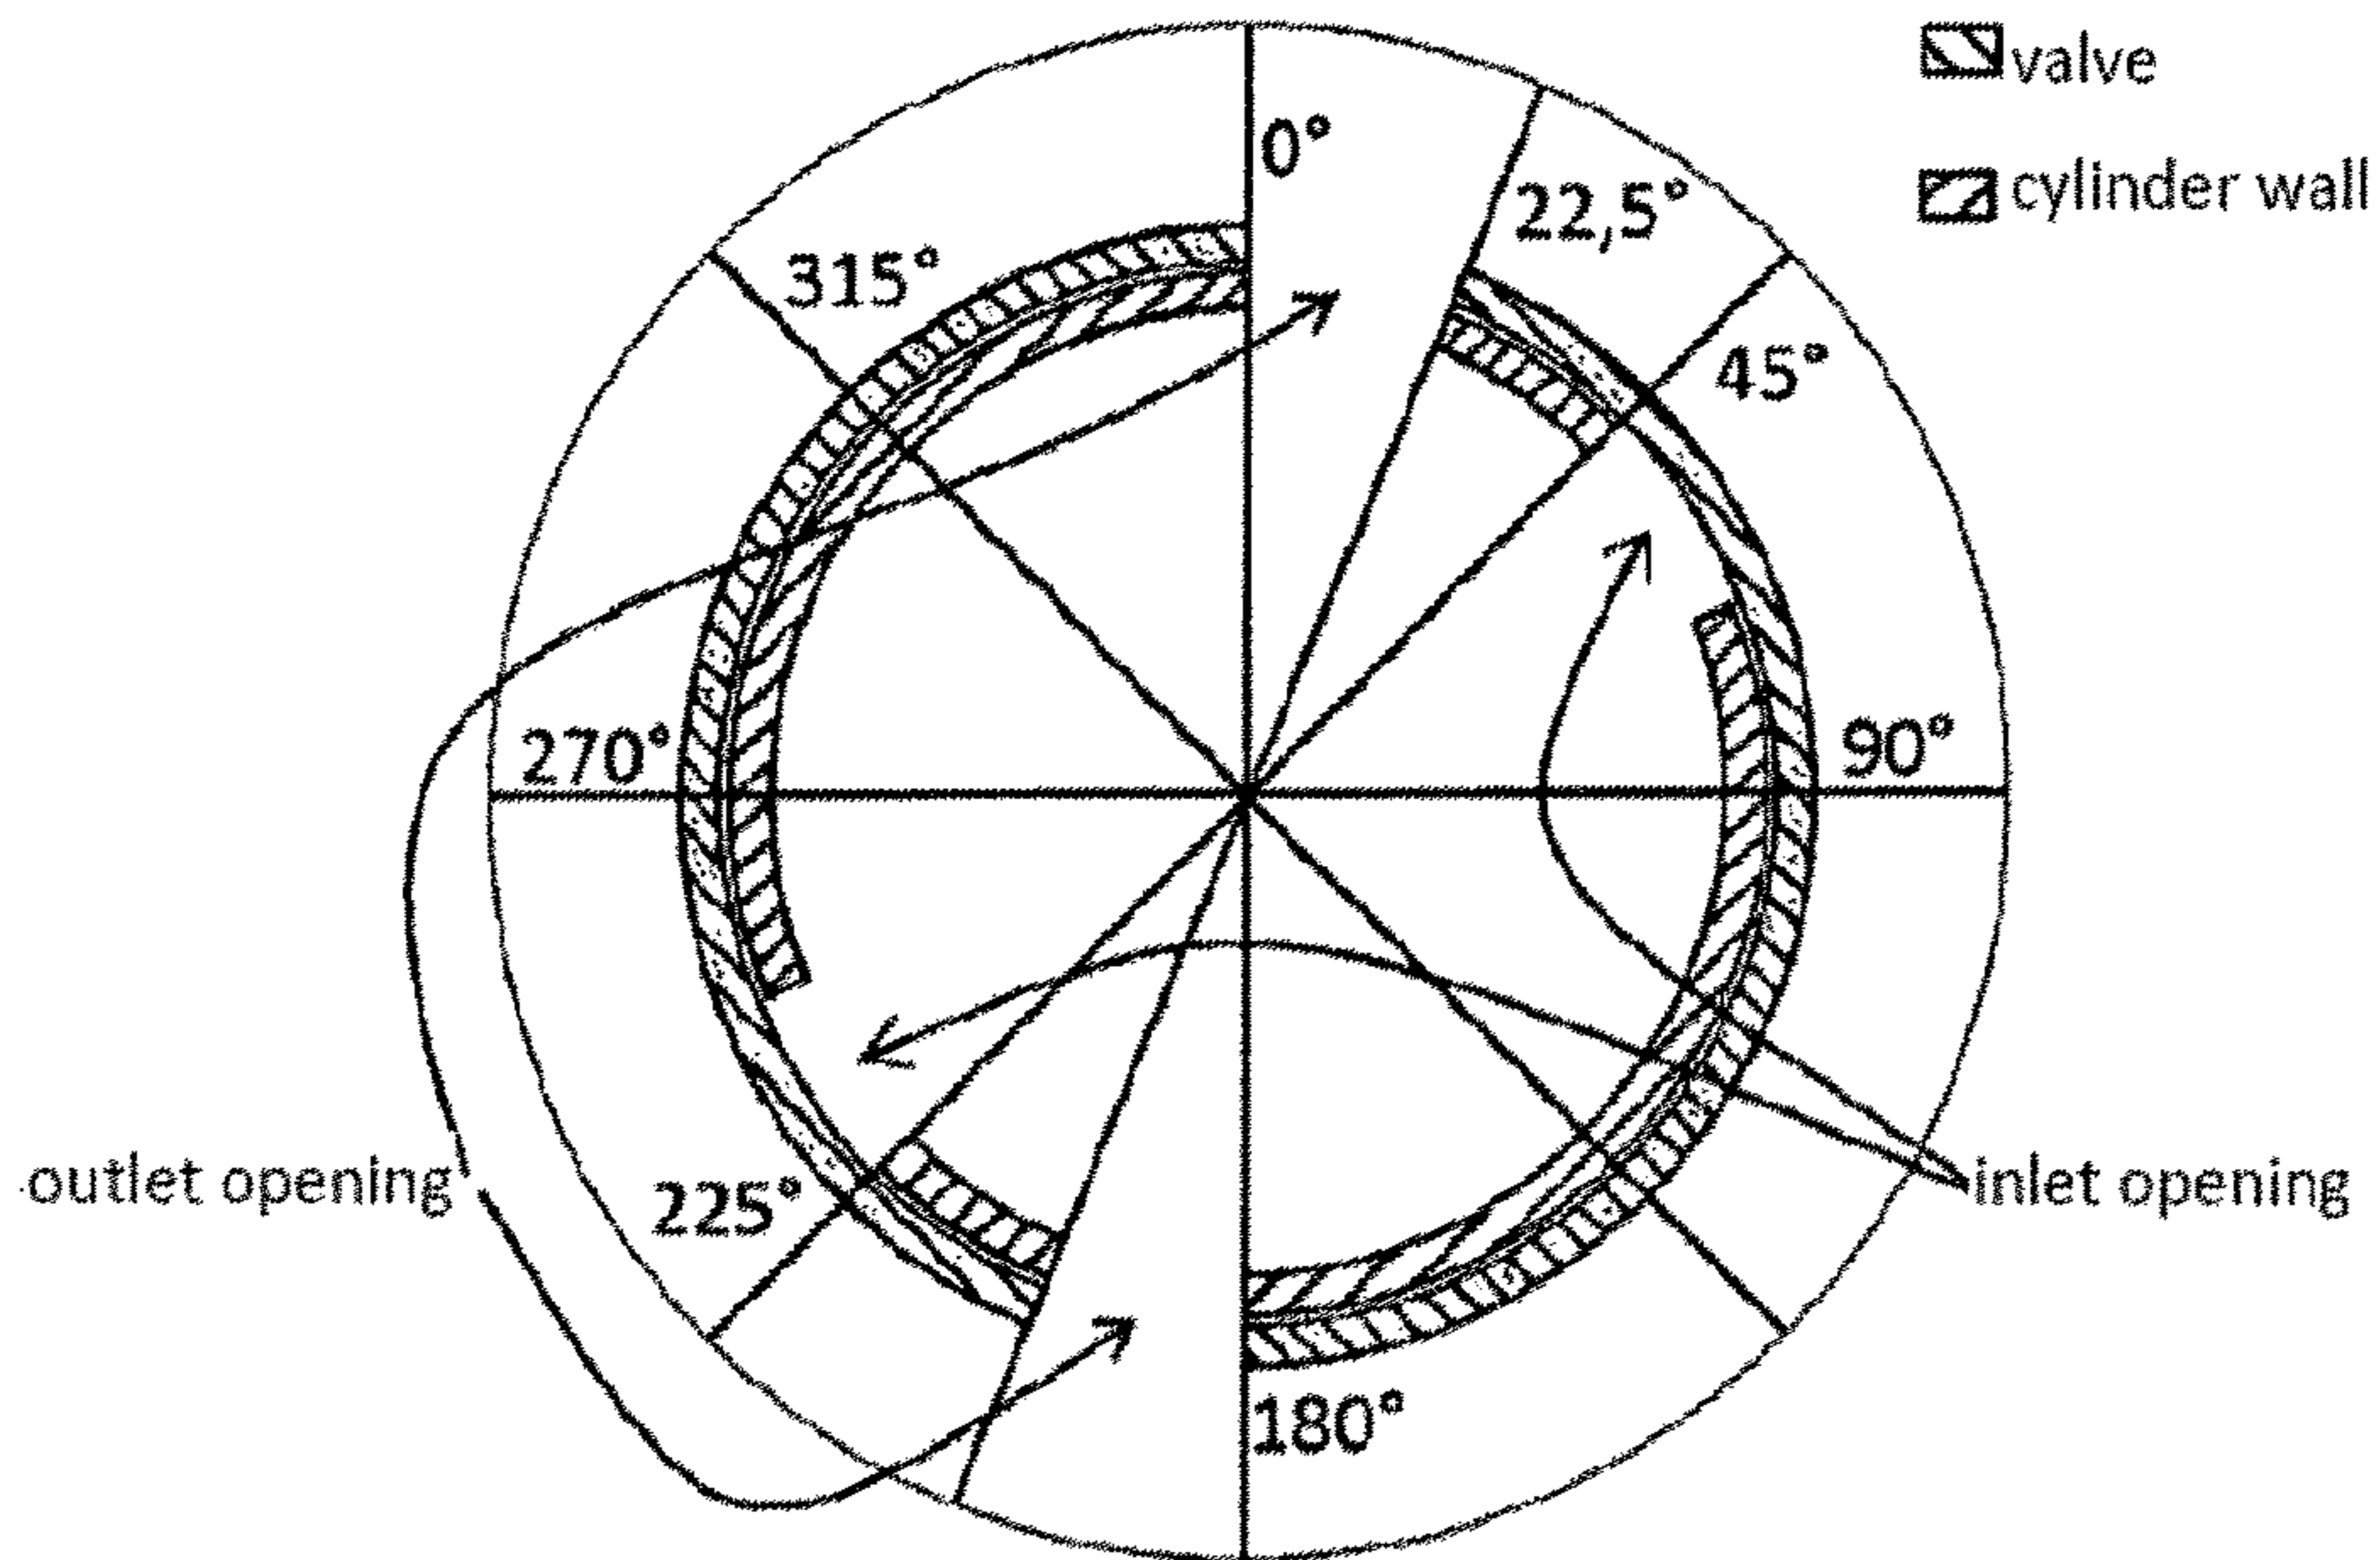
Cross-section of a rotary valve with 2 openings around a cylinder of a four-stroke engine
